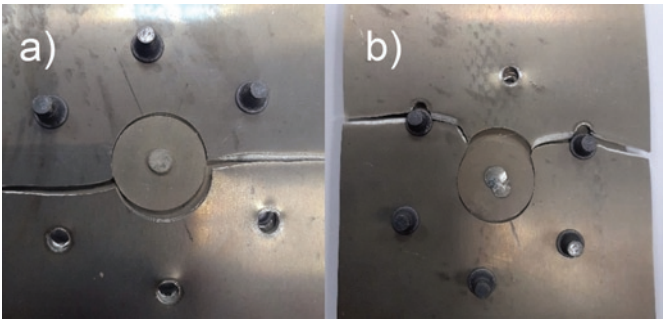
Fracture of the strapped specimen riveted with fasteners: (a) following fatigue test, (b) following static strain test
